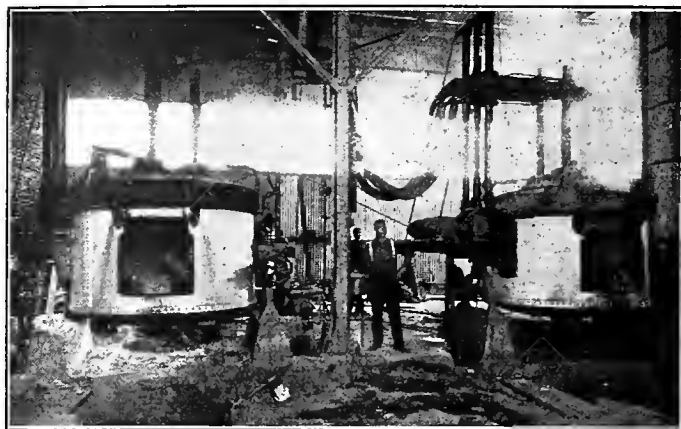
Typical steel melting furnace installation, Alloy Steel & Metals Company, Los Angeles
